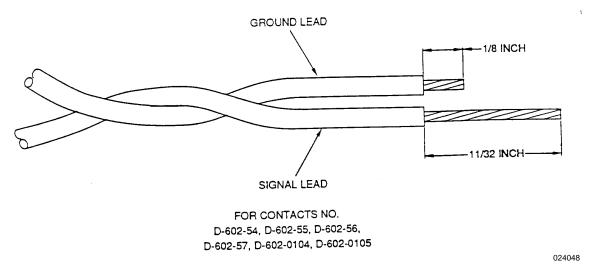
Strip Dimensions for Twisted Pair Solder Contacts
